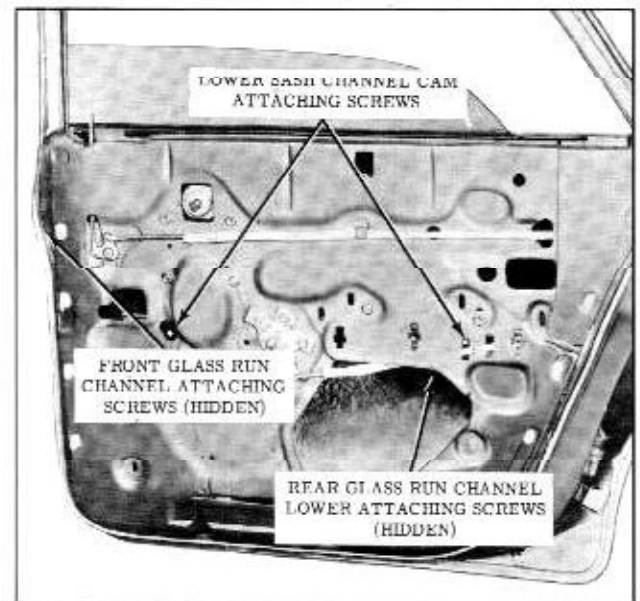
Rear Door Assembly ('35', '45' & '69' Styles)
